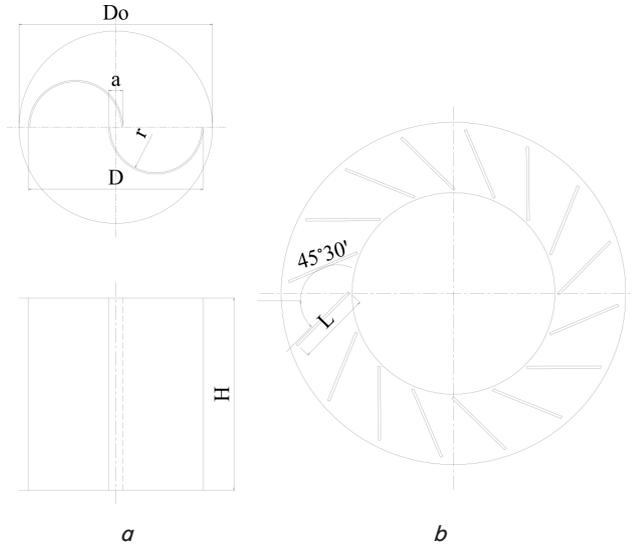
Dimensions of Savonius wind turbine and guide vane
